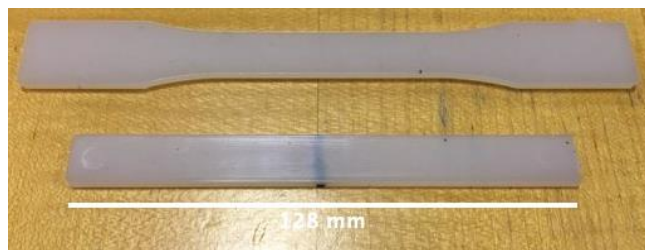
Injection molding dog-bone (top) and flex bar (bottom) samples marked halfway
